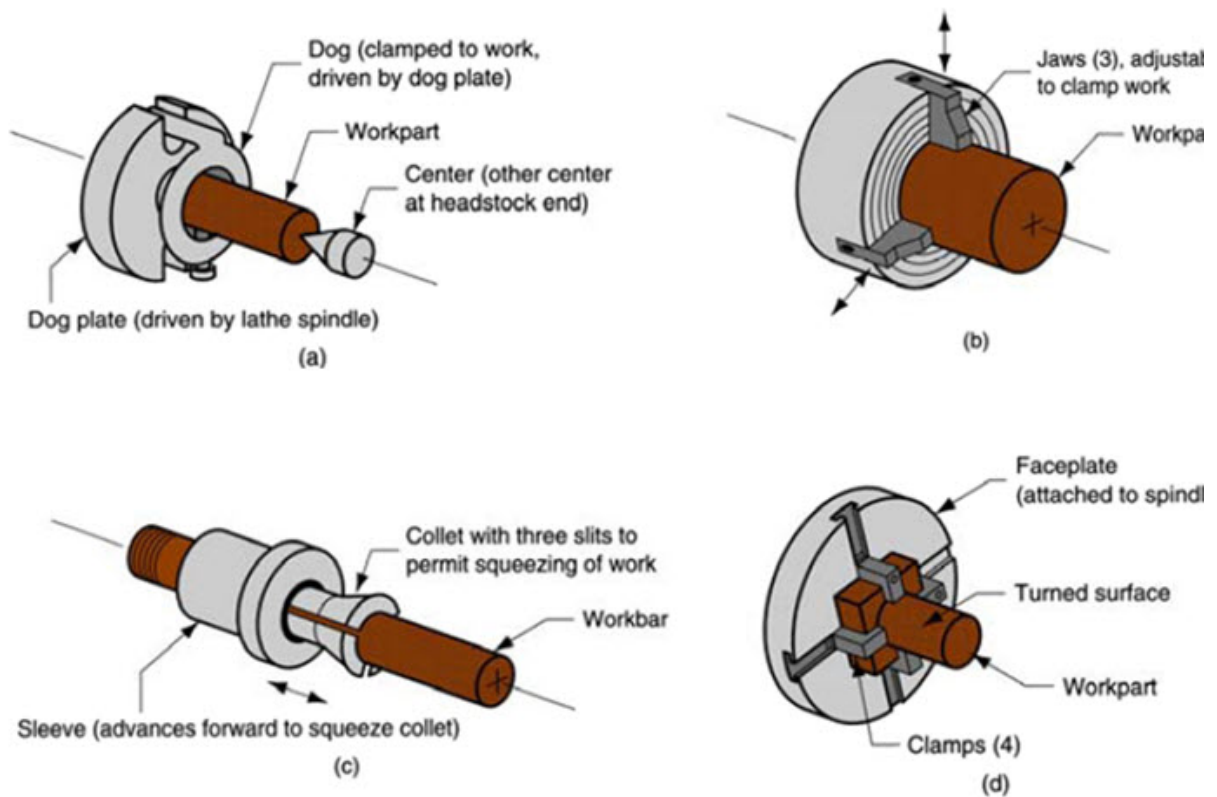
Four work holding methods used in lathes: (a) mounting the work between centers using a dog, (b) three-jaw chuck, (c) collet, and (d) faceplate for non cylindrical workparts.
